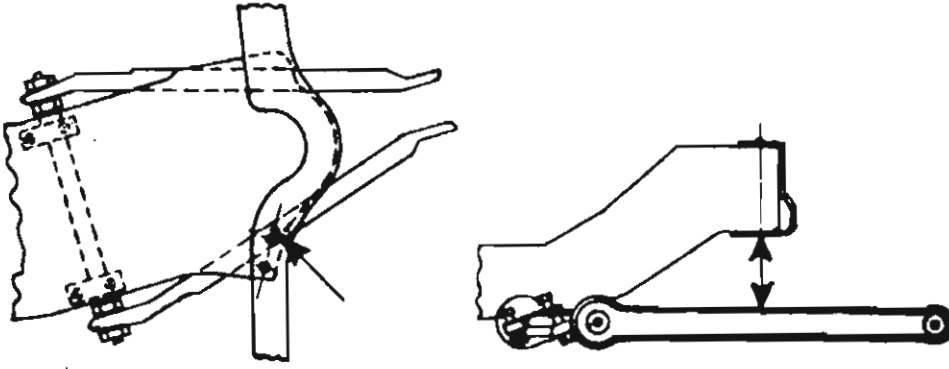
Front End Should Be Pulled Down Until the Distance Between the Points Indicated Measures $3\frac{1}{2}$ ".
